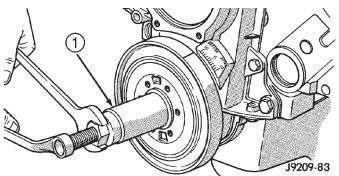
Vibration Damper Assembly* 1 – SPECIAL TOOL C-3688
